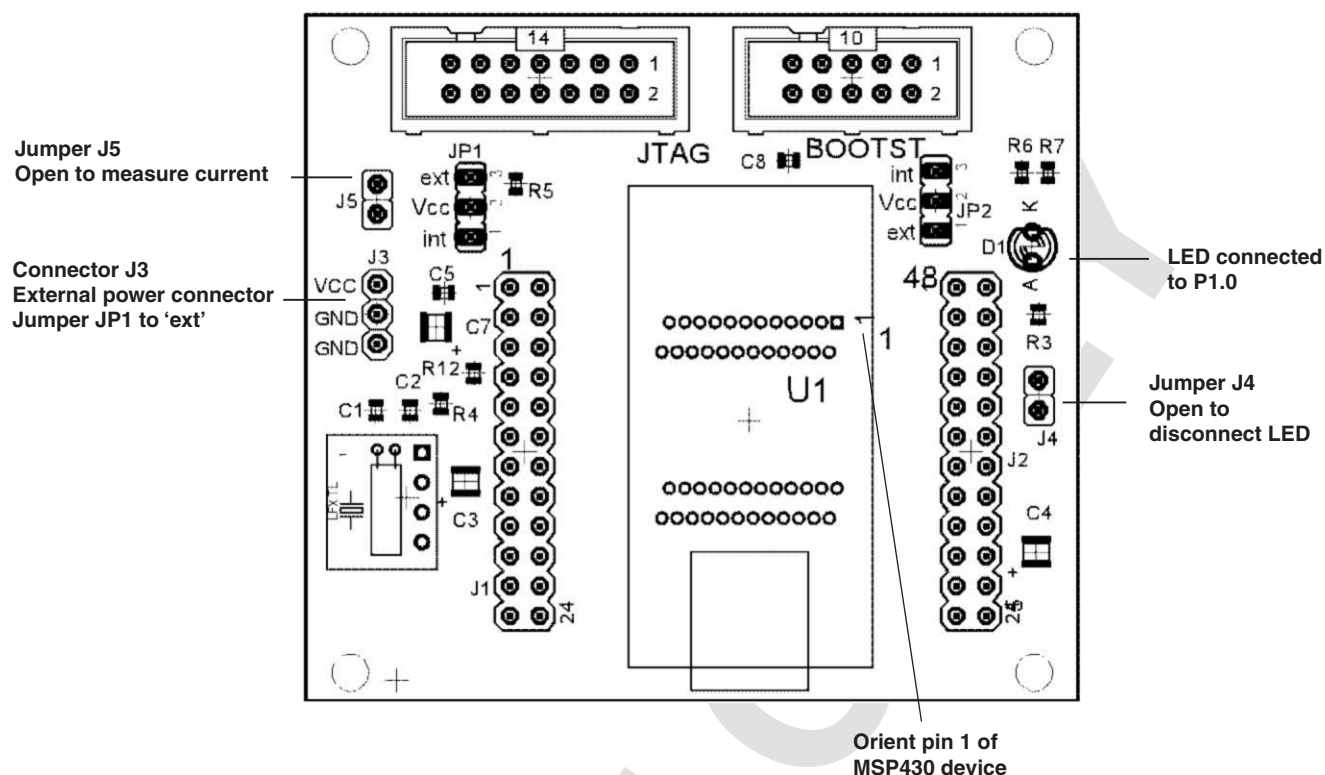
MSP-TS430DL48 Target Socket Module, PCB
